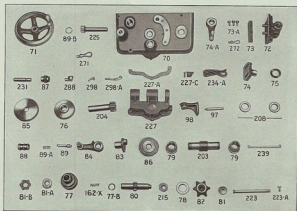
Apron Parts for Series "S" South Bend Lathes.
